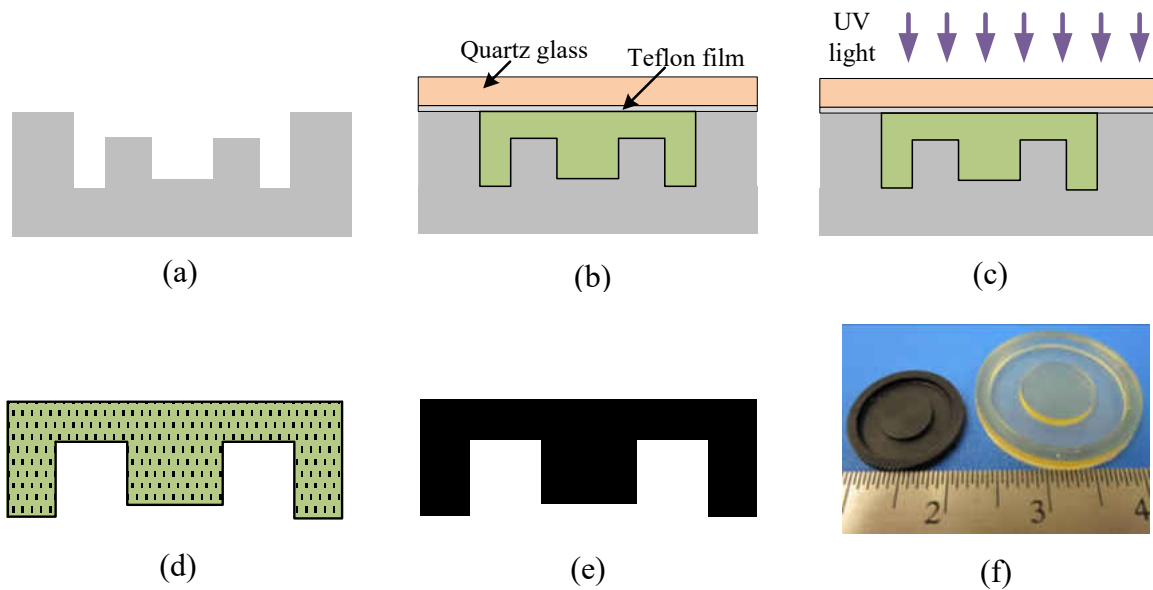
Fabrication process flow of the PDC cavity bottom. (a) Machining of the Teflon mould. (b) Liquid ceramic precursor in the mould. (c) UV exposure. (d) Polymer demoulding. (e) PDC sintering. (f) Photos of the polymer (right) and sintered PDC (left).
